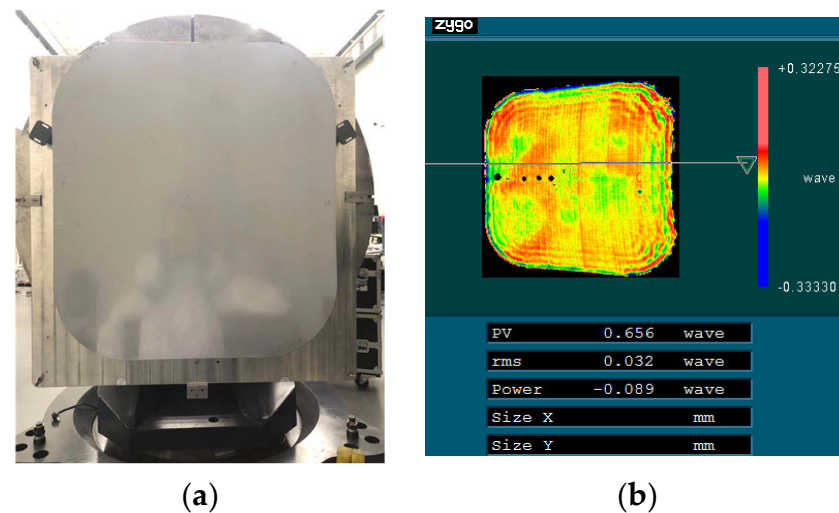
Test of mirror accuracy. (a) The mirror assembly is in the detection state. (b) Optical testing result of mirror assembly.
